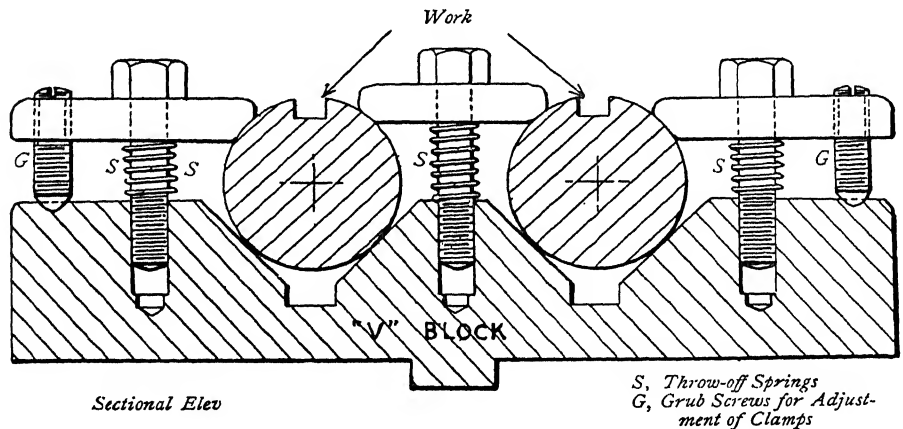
Vee Blocks for Two Shafts, Clamp Plates adjusted with Grub-screws and thrown off with Springs
